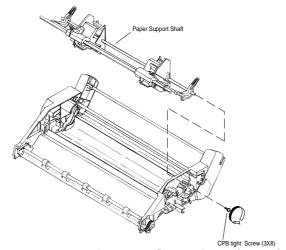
Removing the CBP Tight (3 X 8) Screw
